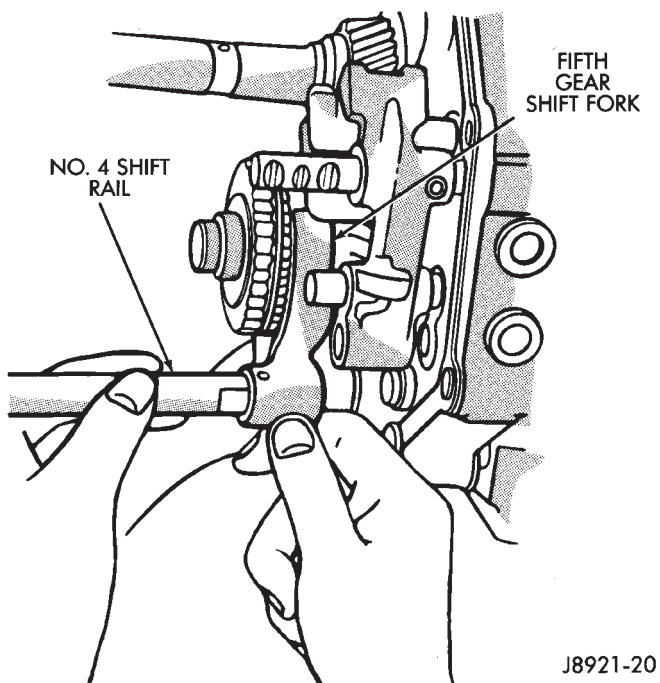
Removing No. 4 Shift Rail And Fifth Gear Shift Fork
